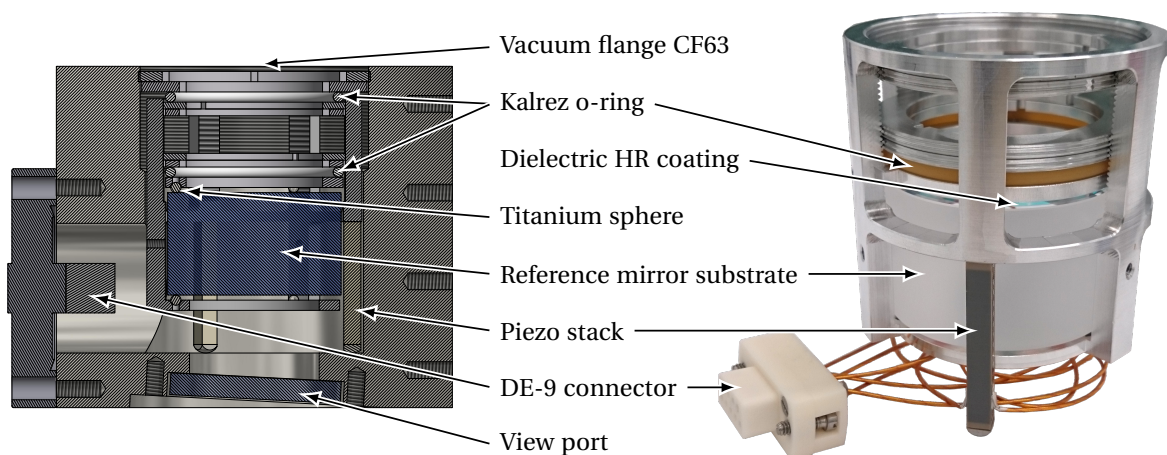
A section view (left) of the reference mirror inside the bottom vacuum chamber and a picture (right) of the mirror holder assembly.
